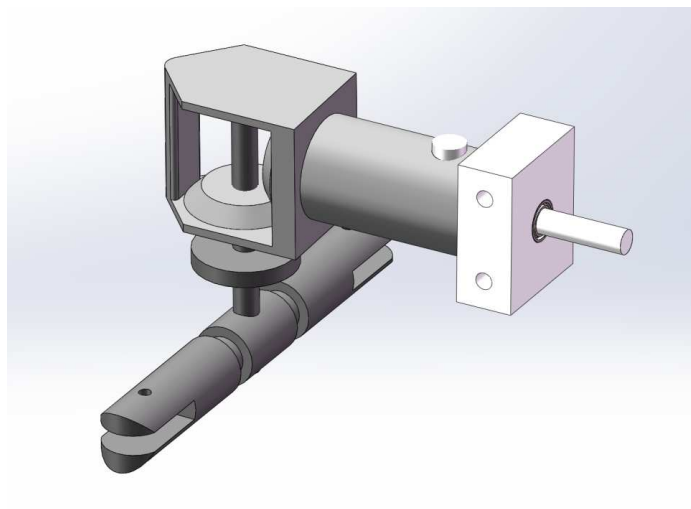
The complete assembly of the rotor head connector with the rotor head
